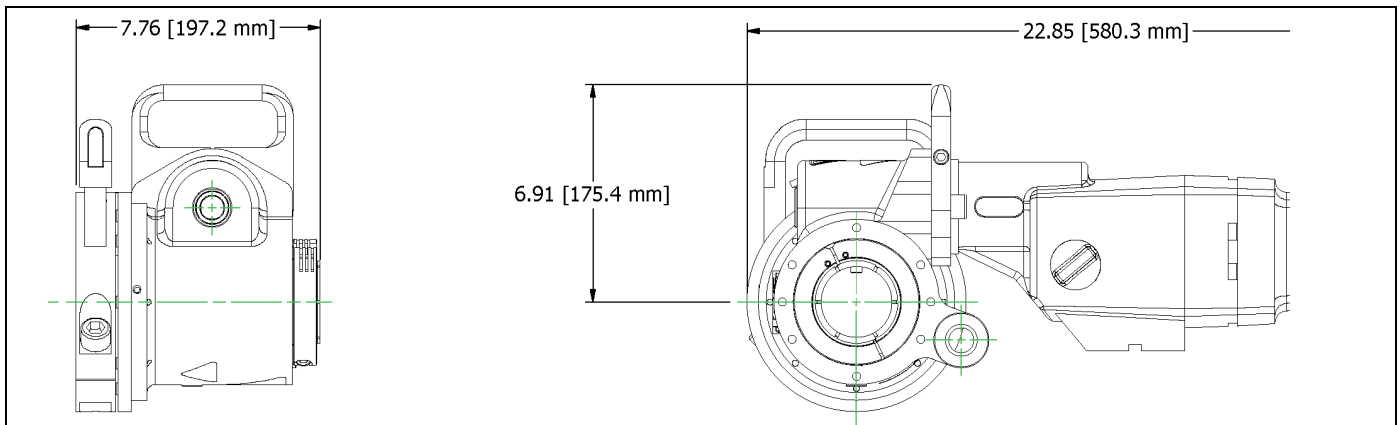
RDU AND EIBENSTOCK MOTOR DIMENSIONS
